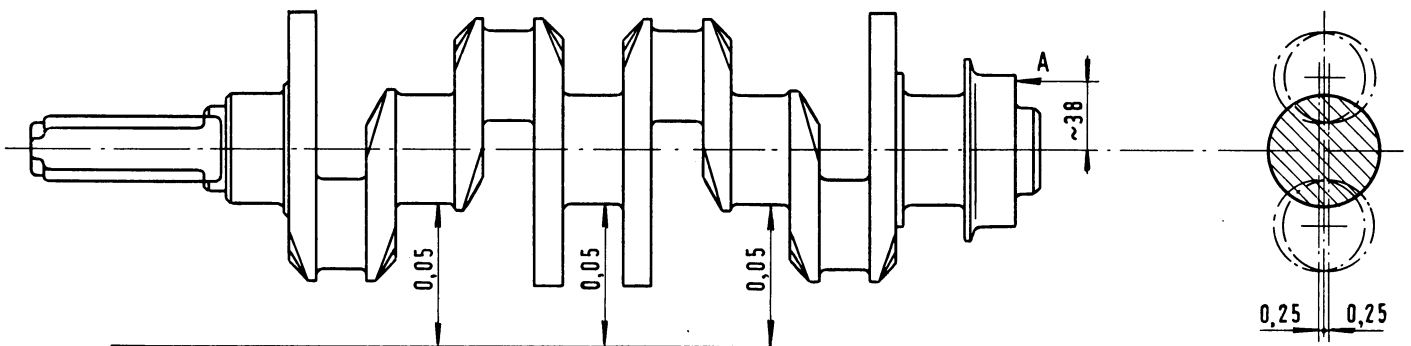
Maximum out-of-true allowances on alignment of main bearing journals and of connecting rod journals to main bearing journal axis; quotation for squareness inspection of flywheel resting face to crankshaft centerline (engine 118 B.000).
